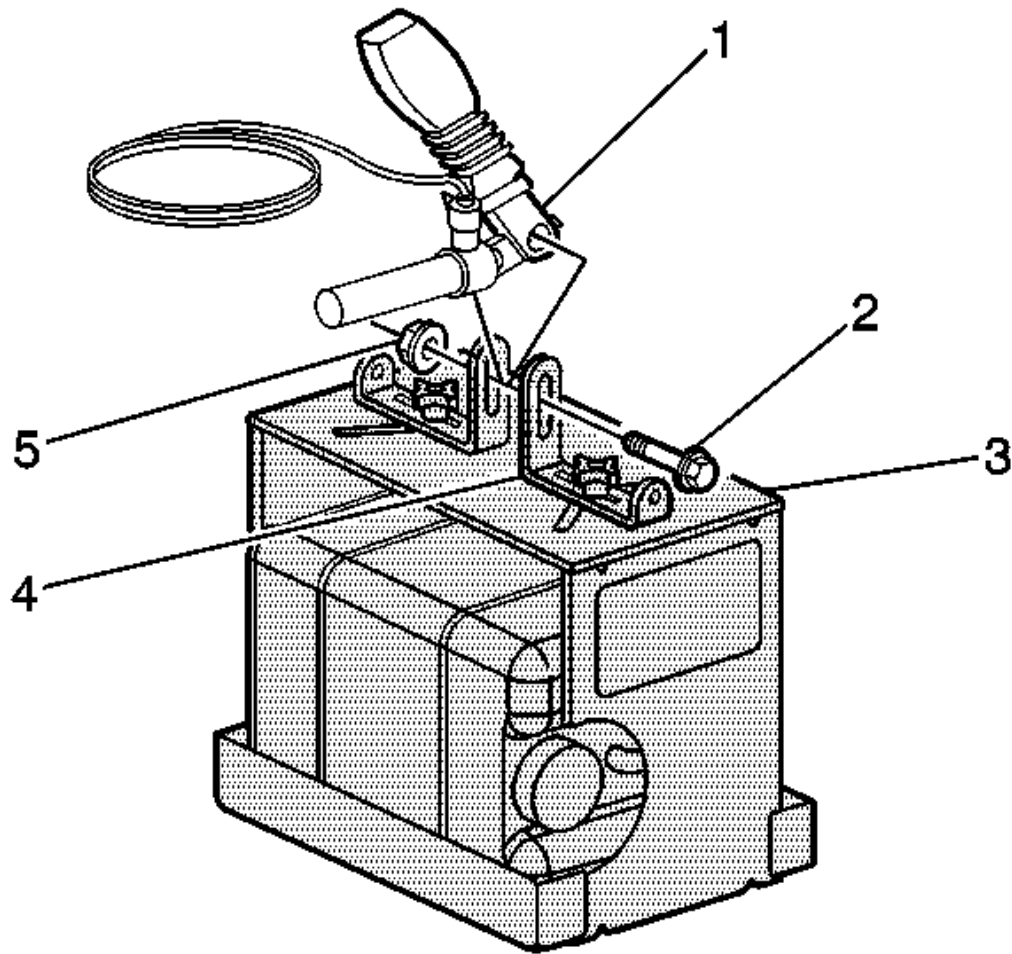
Mounting Pretensioner In SIR Deployment Fixture
